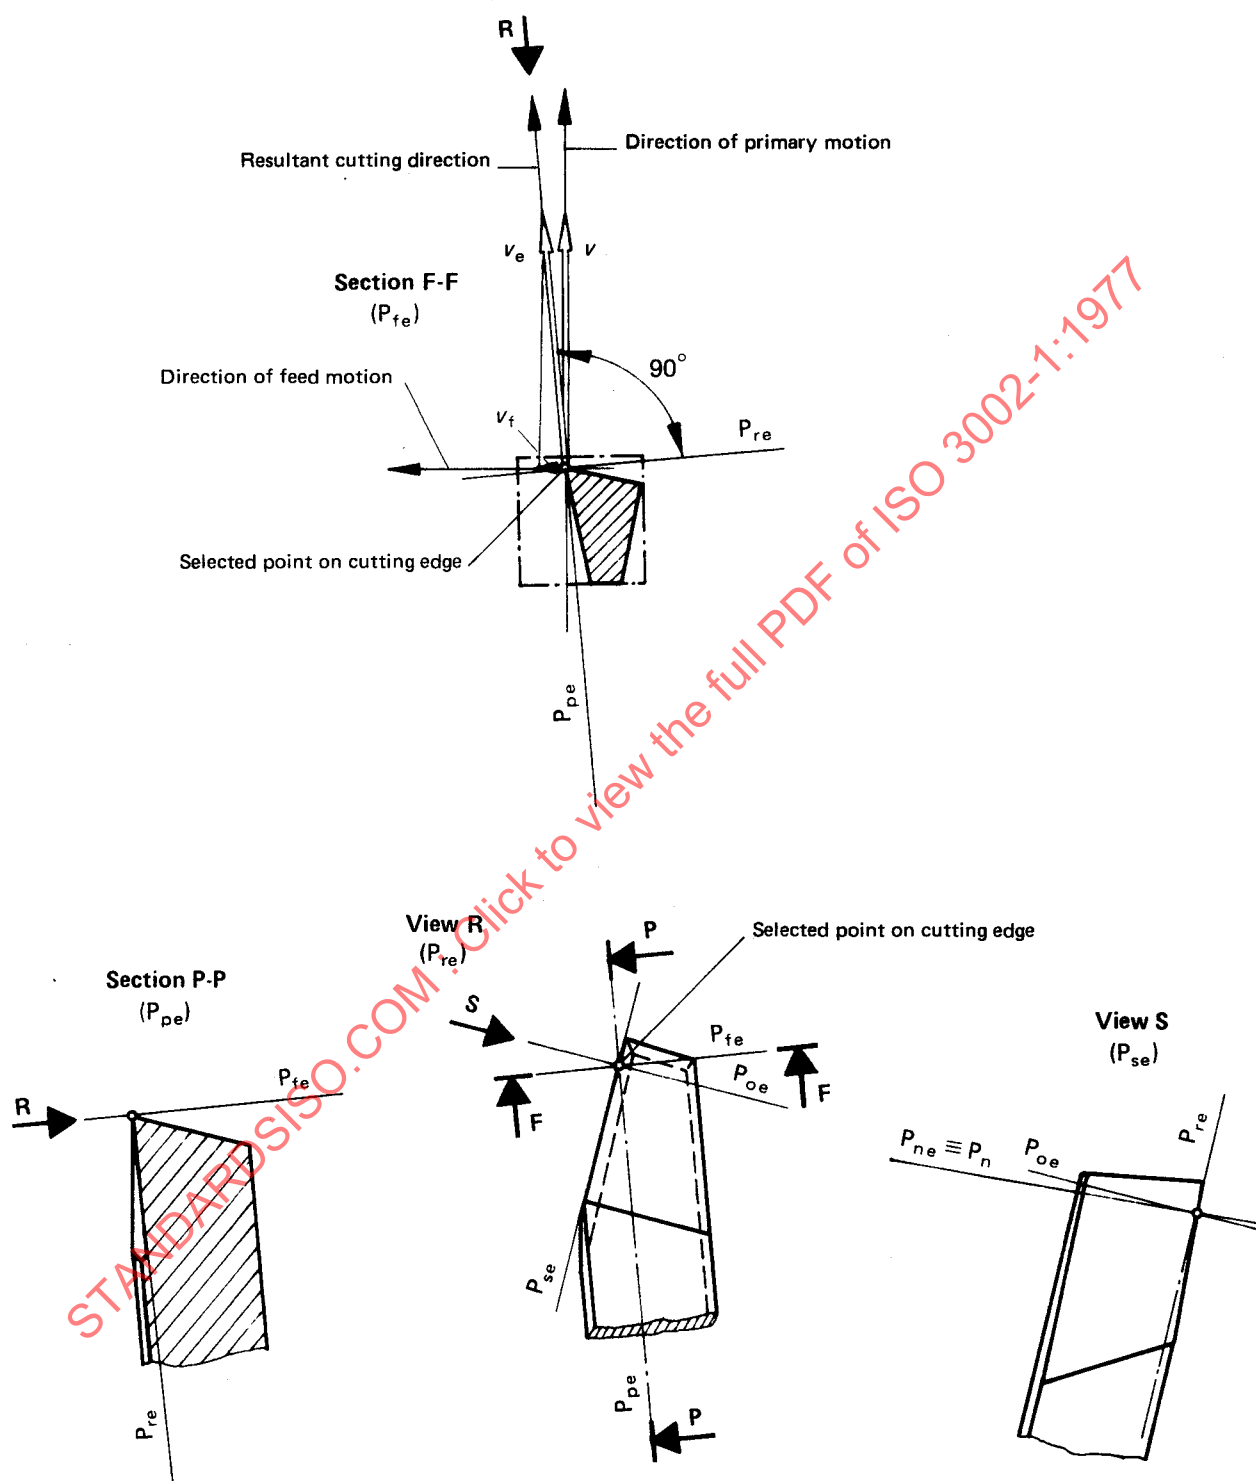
Planes in the tool-in-use system — Turning tool
